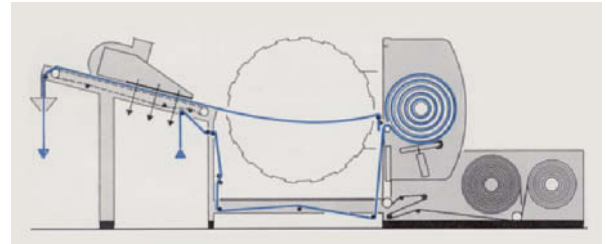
Diagram of a Menschner/Kettling & Braun kier decatizing machine.
